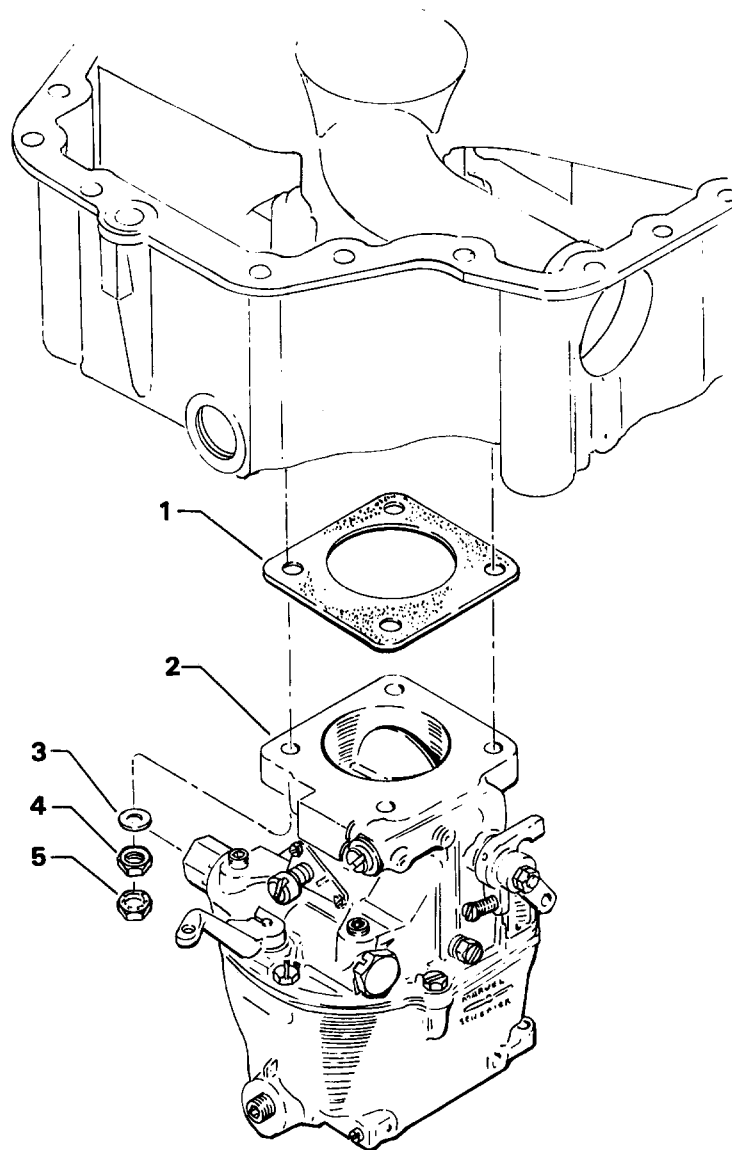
INTAKE PIPES AND ATTACHING PARTS
